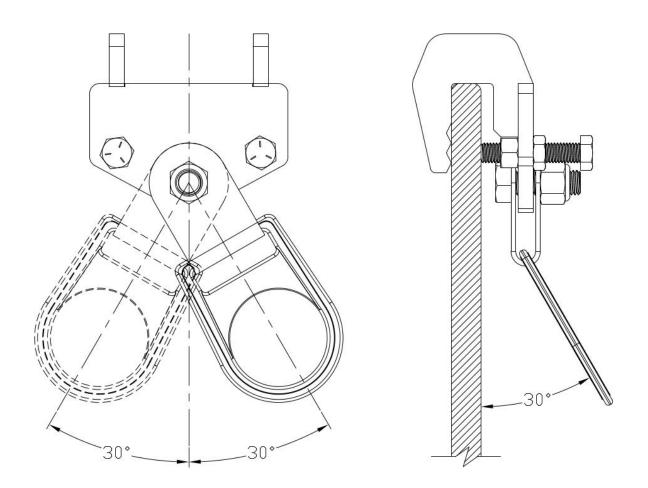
Vertical Steel Plate Anchor Installation Limitations
